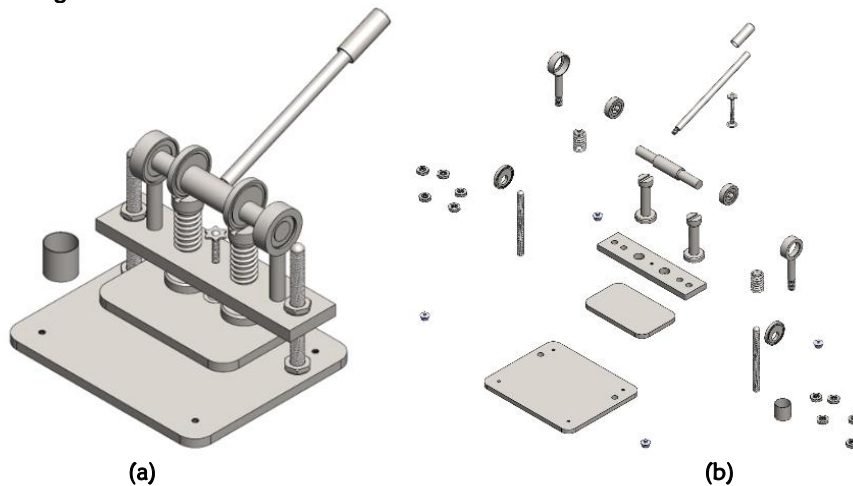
(a) Improved Design of Hand Press Machine (b) Exploded View of Improved Design
